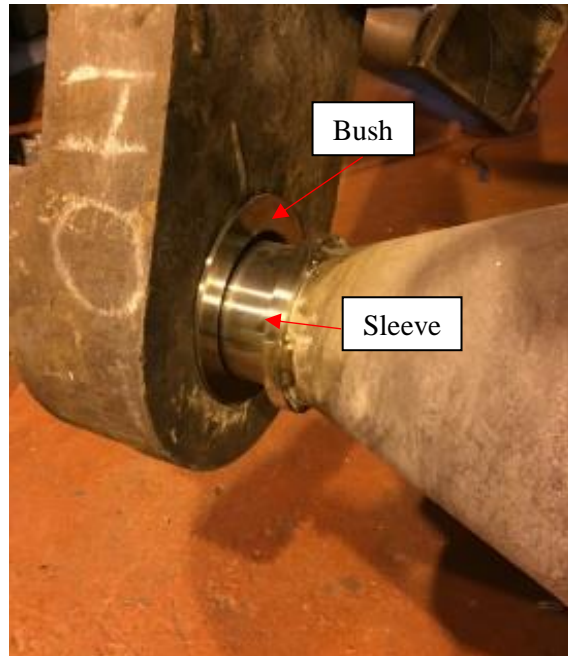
Example of a sleeve and bush component that forms the journal bearing [16].
